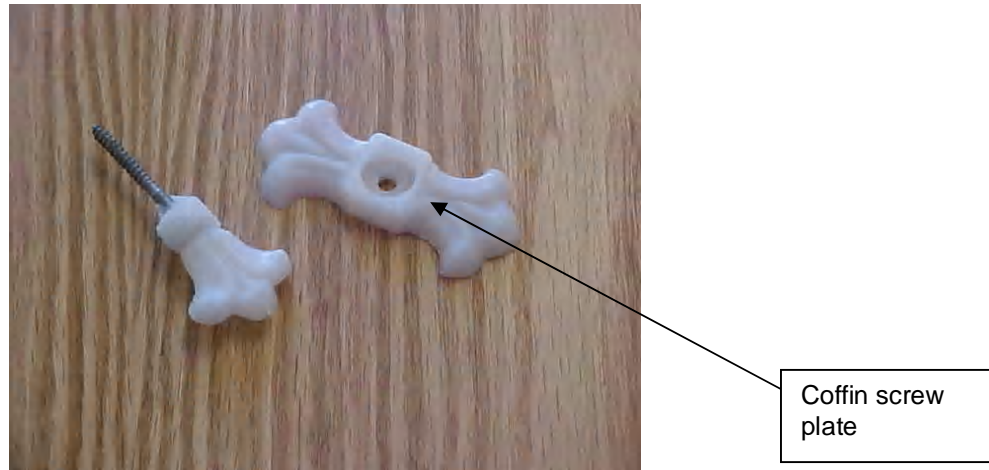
The coffin screw plate part which was manufactured in this case study
